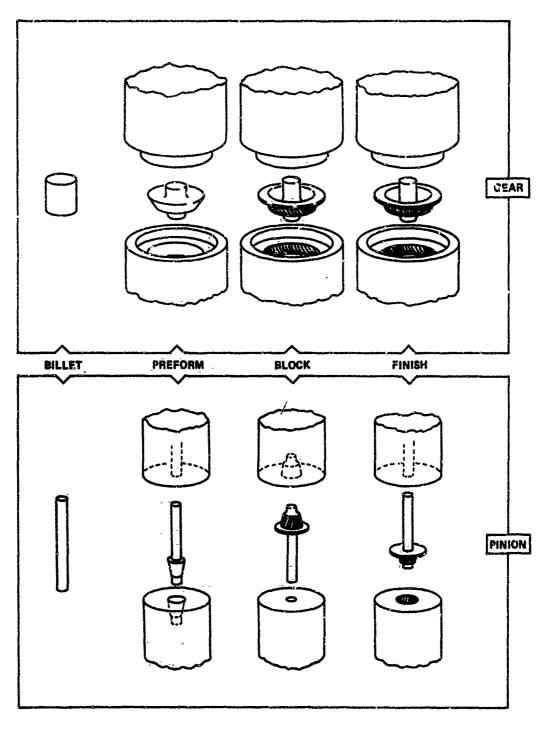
Forging Steps and Die Arrangements Used for Pinion and Gear Forgings
